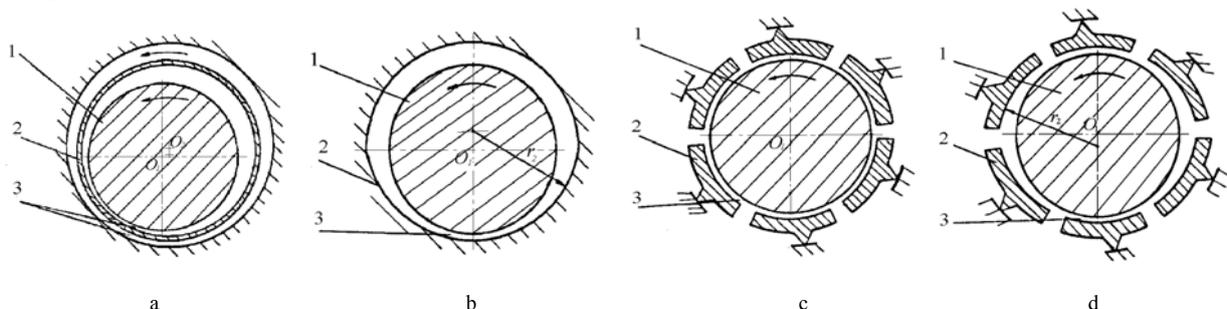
Bearings : a – self-adjustment including floating ring bearings, b – elliptical bearings, c - tilting-pad journal bearings, d - elliptical tilting pad journal bearings; 1 - rotor, 2 - floating spacer or segment, 3 - carrying lubricating layer
